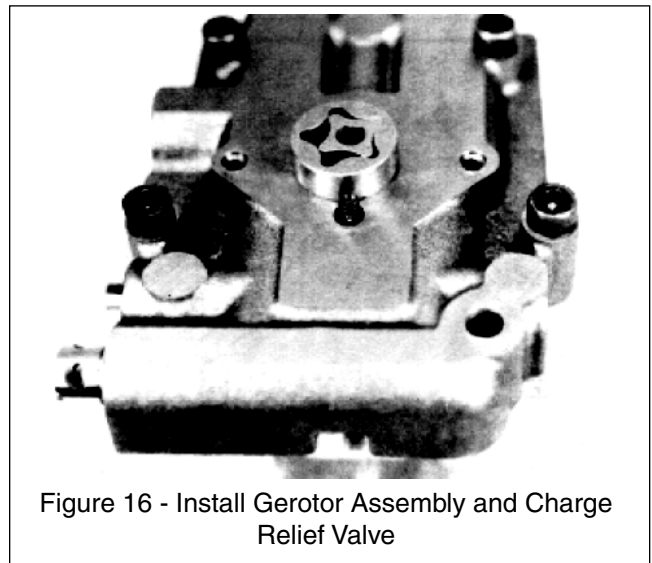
Install Gerotor Assembly and Charge Relief Valve
